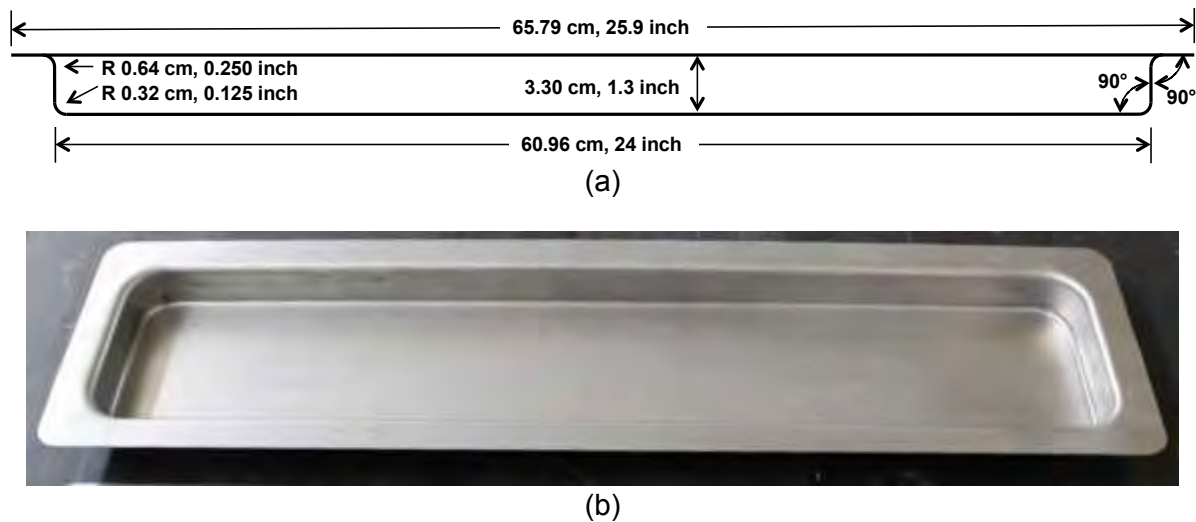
(a) Drawing and (b) image of the finalized HIP can design, incorporating tight punch and flange radii, vertical walls, and a flat flange to facilitate welding. Width of can is 12.70 cm (5.0 inches), and the radii of the corner of the can are 2.54 cm (1.0 inch).
